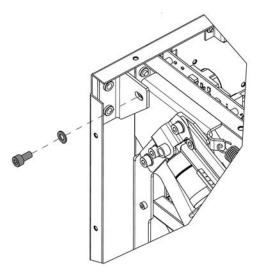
Screw Securing Latch Mechanism Actuator Bracket to Back Panel
